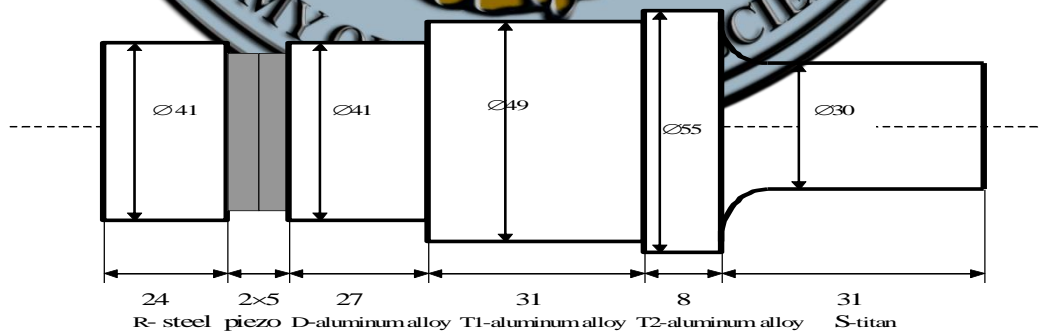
The acoustic chain realized by us for equipping the welding machine.
